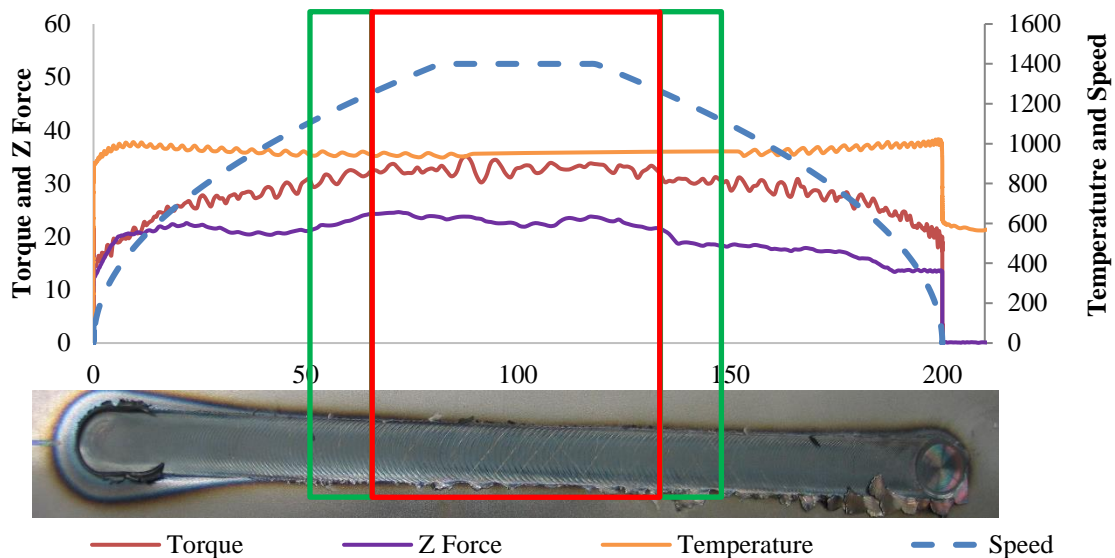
Weld produced with a PL12 tool at 1400 mm/min and 1000 rpm.
